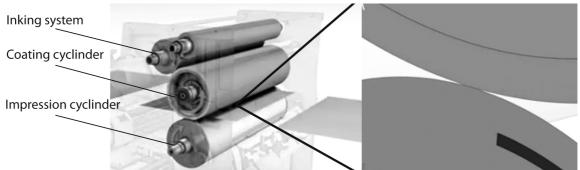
Common coating Print Unit (KBA-Metalprint coating line).
